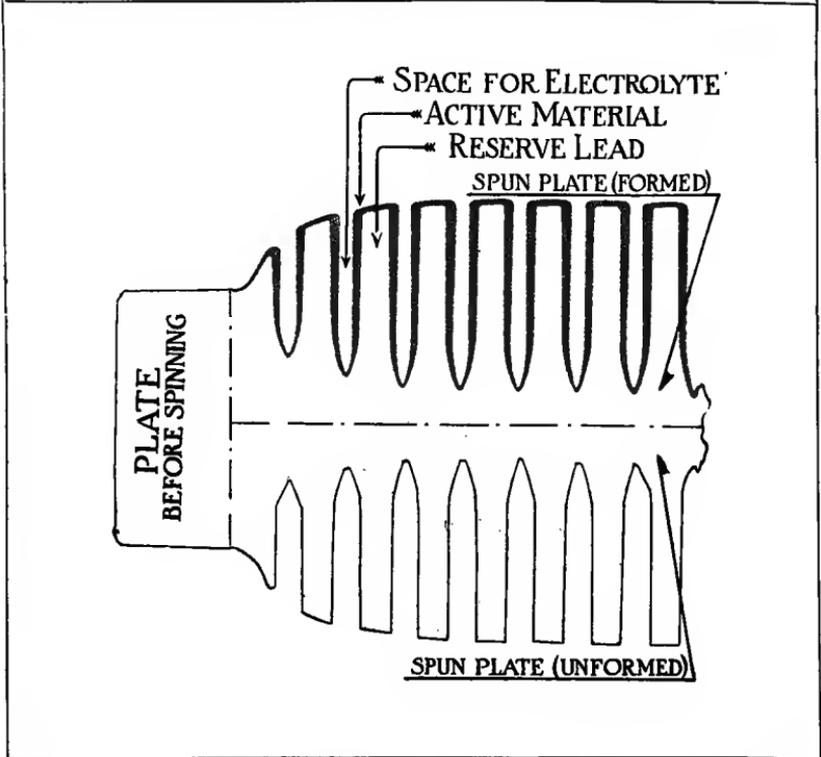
Showing Sections of Completely Spun and Formed "Gould" Planté Plate.
